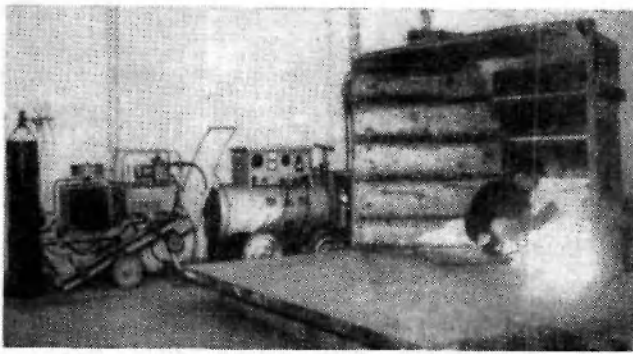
MIG Welding Dumper Placer Buckets
